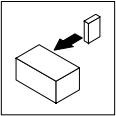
Dimensions 8215 - 8218: Standard assembly
